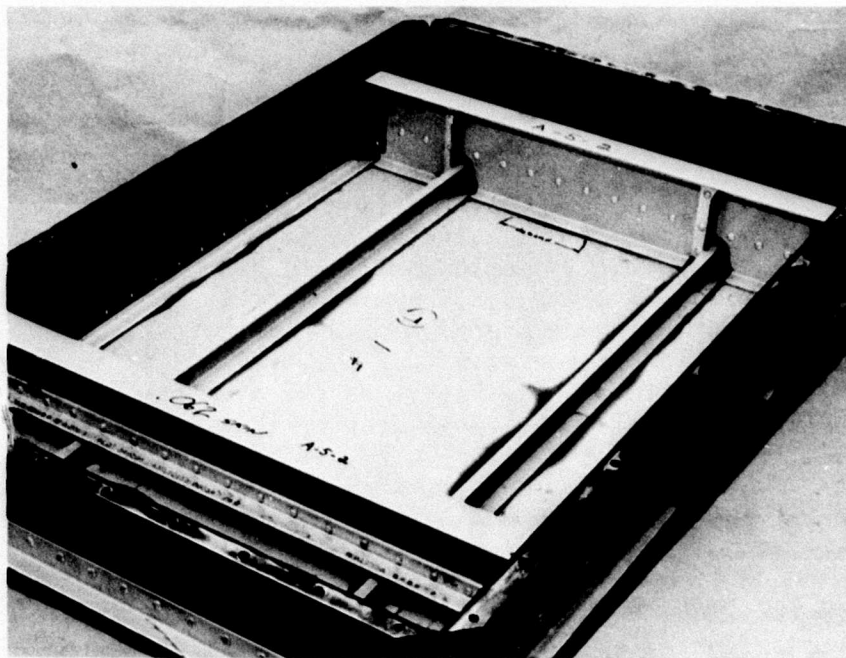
Bond Failure at Upstream I-Section Stiffener of Panel A-5-2
